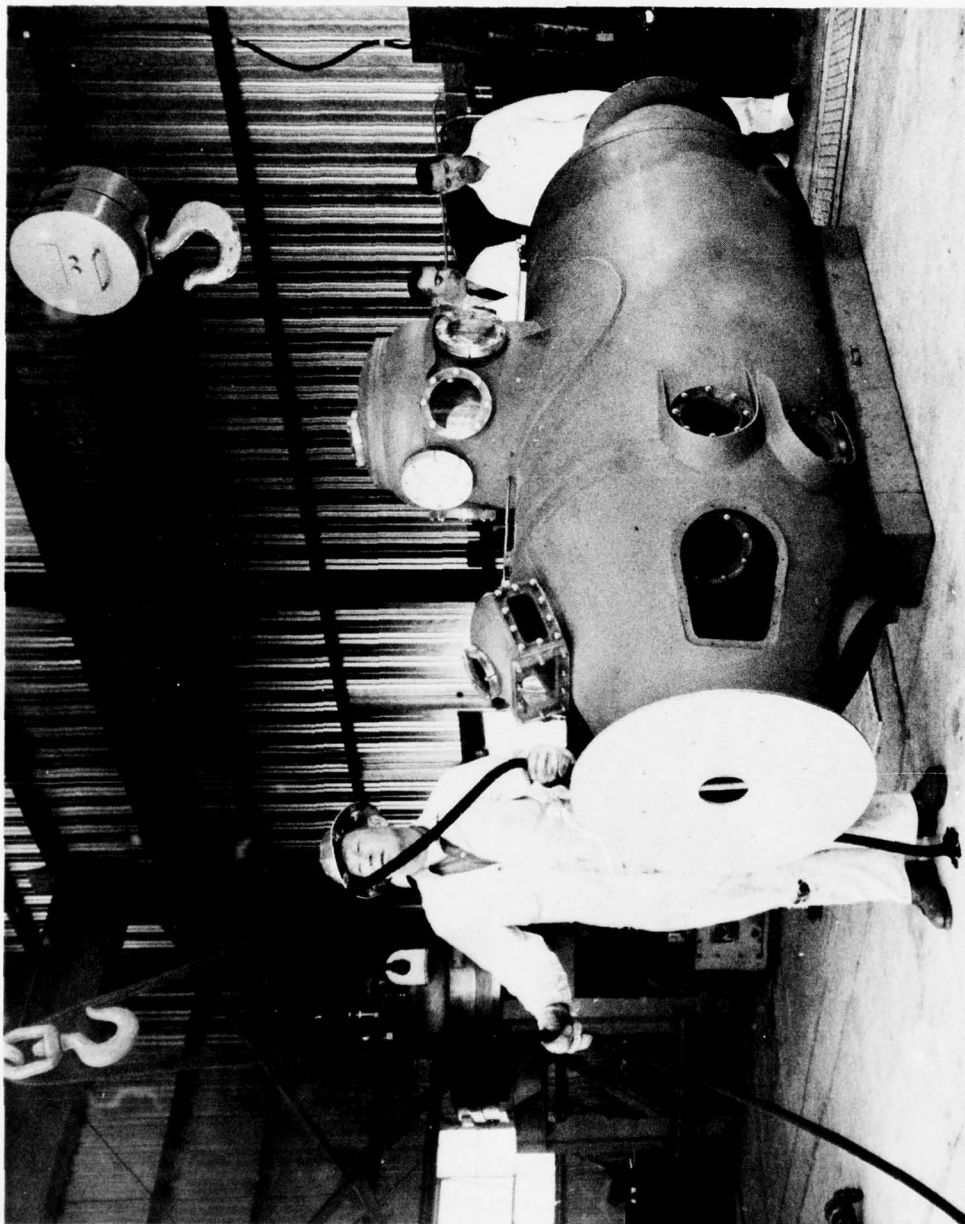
Typical application of round and rectangular plane windows in a shallow-depth submersible.
